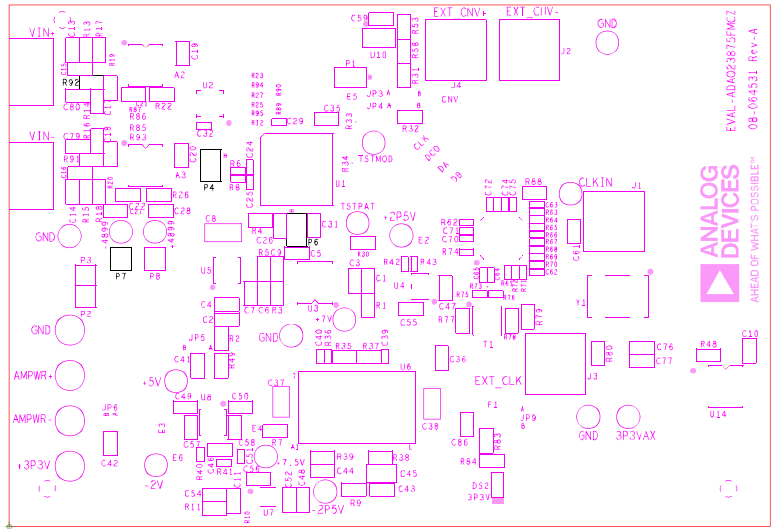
EVAL-ADAQ23875FMCZ Board Primary Silkscreen
